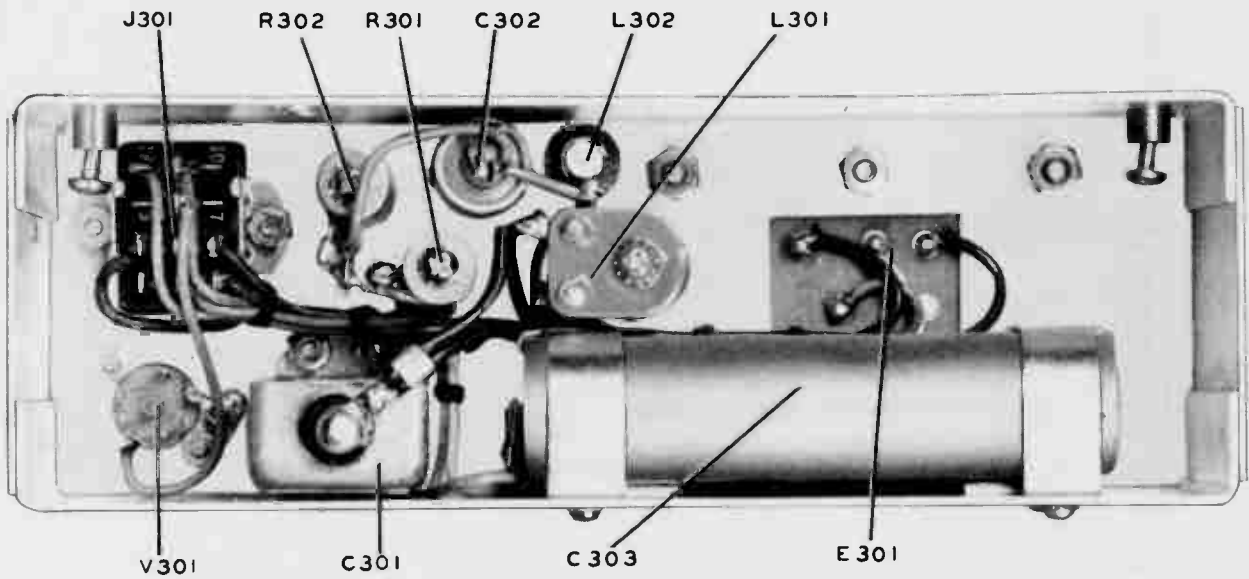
D.C. Power Supply - Parts Arrangement - Bottom View.
